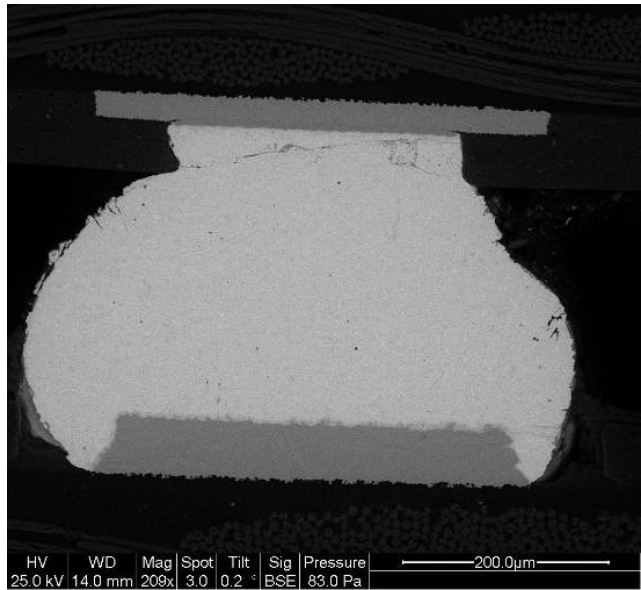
Cross section of corner SAC305 solder ball, component U6, ball A1
